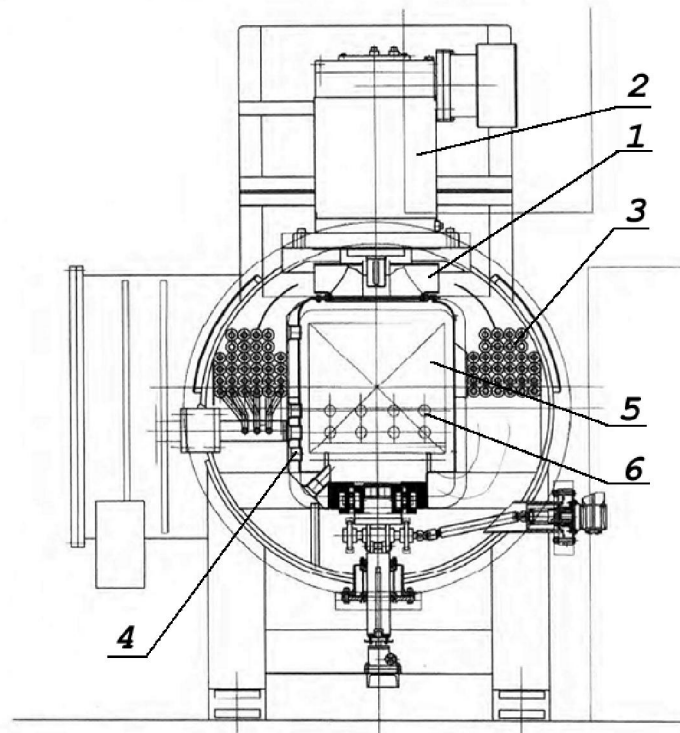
Cross-section of the HPGQ furnace cooling chamber according to the design by SECO-Warwick [1]
